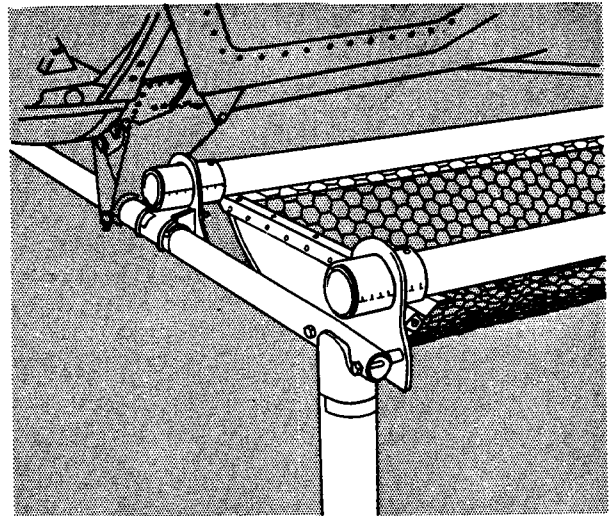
Typical cargo rack installation No. 1 (showing attachment detail).
